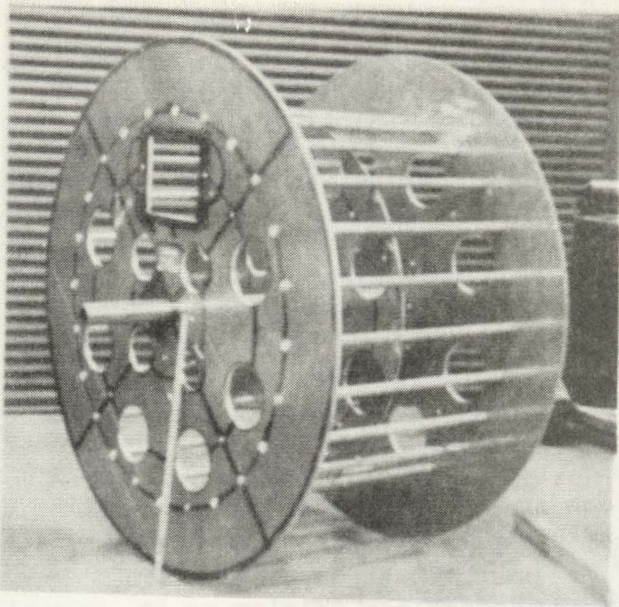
The cable drum support discs were cut round with a metal band saw. Next, the discs were gang drilled for all the hole patterns. Twenty-four holes in the discs serve as sockets for the spacer rods that form the drum support structure. A metal inert gas (MIG) welder is used to weld the rods to the discs. A 70-mm thick skin is clamped over the support rods and welded as seen in Figure 4b.
